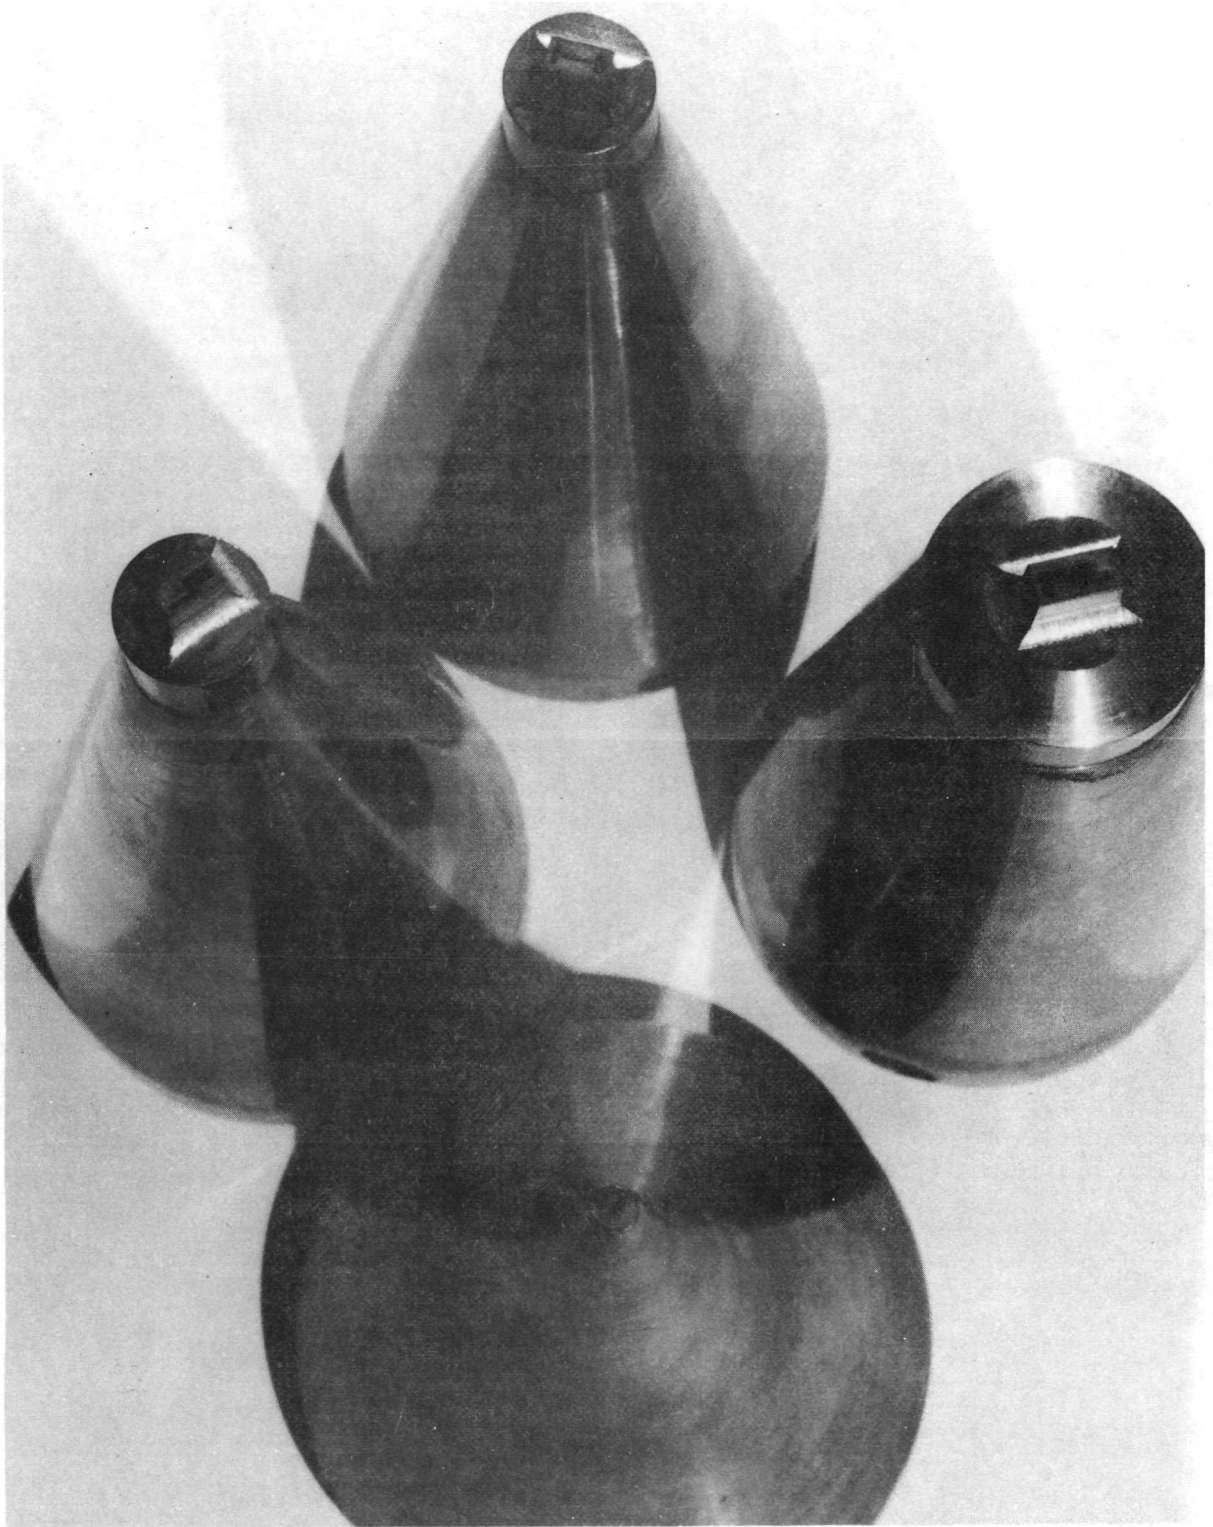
Ultrasonic Impact Grinding Tools for Double Probe Design
